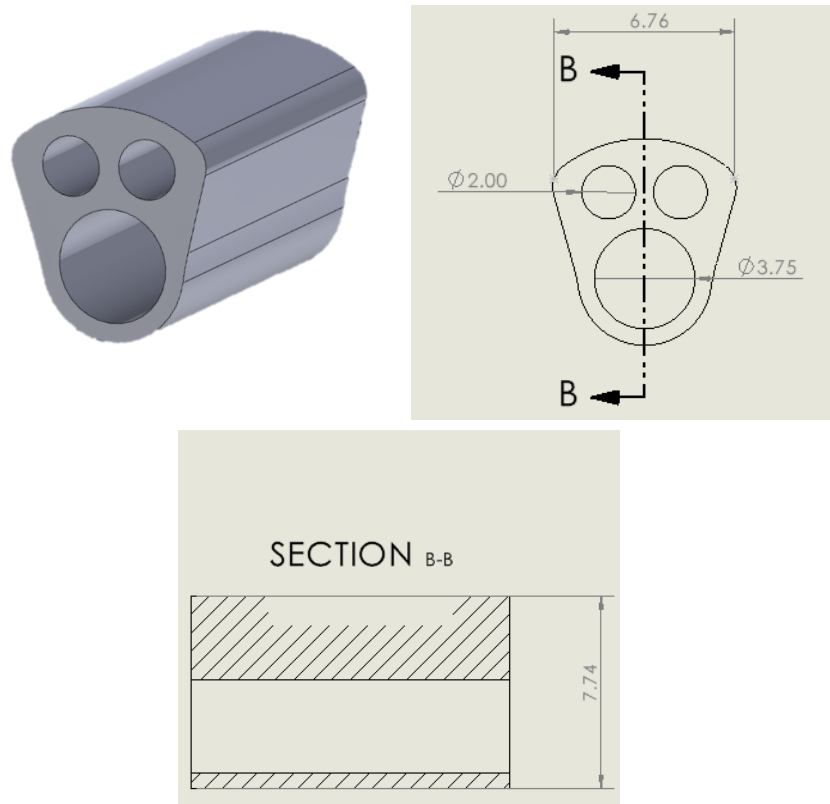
The complete model for the Channeled Sheath is shown in the top left. Shown on the top right and bottom are the CAD drawings of the Channeled Sheath. The endoscope channel has a diameter of 3.75 mm and the tool channels have diameters of 2 mm.
